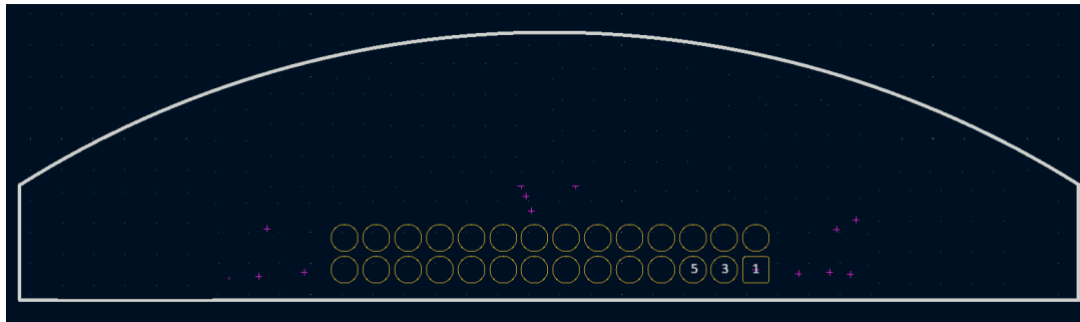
MM Sensing pinouts that plug in the MM Motherboard PCB
